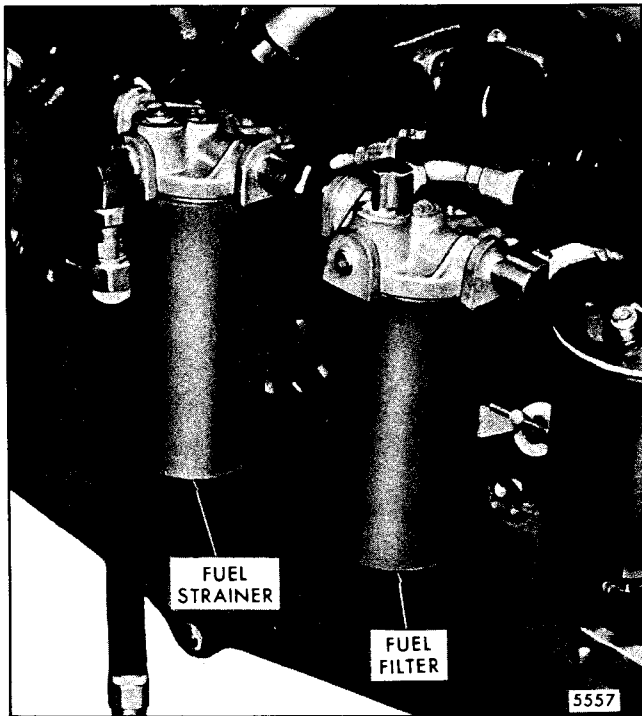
Typical Spin-On Type Fuel Strainer and Fuel Filter Mounting
